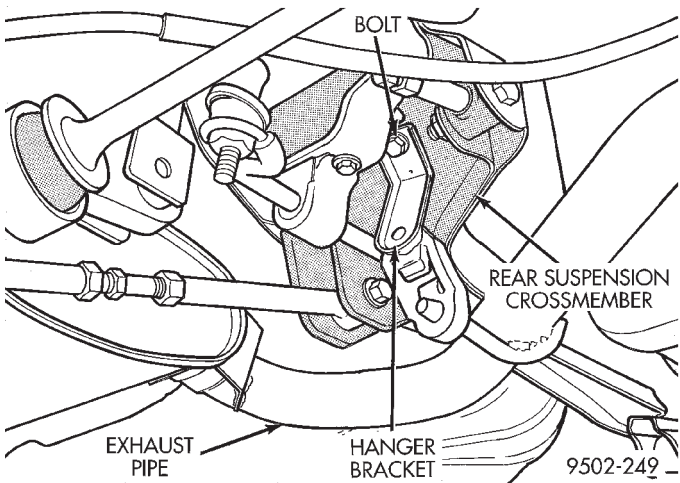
Exhaust Pipe Hanger At Rear Suspension Crossmember
